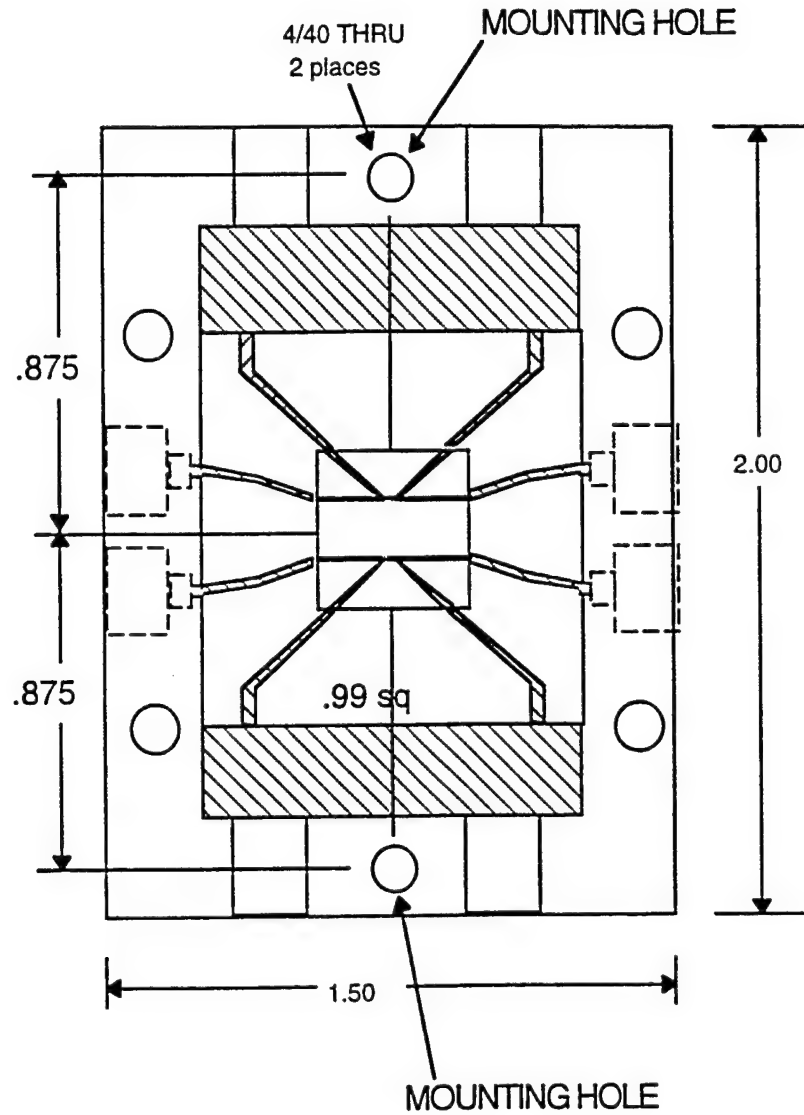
Chip Holder Circuit and HTS Chip Mounted in Housing.
